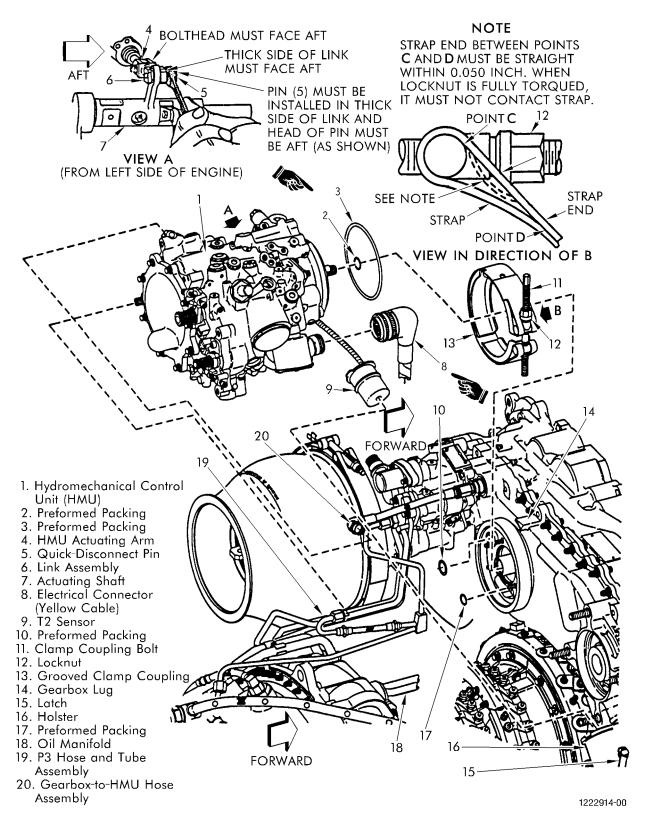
(T700) Hydromechanical Control Unit (HMU) and Grooved Clamp Coupling; Removal and Installation
